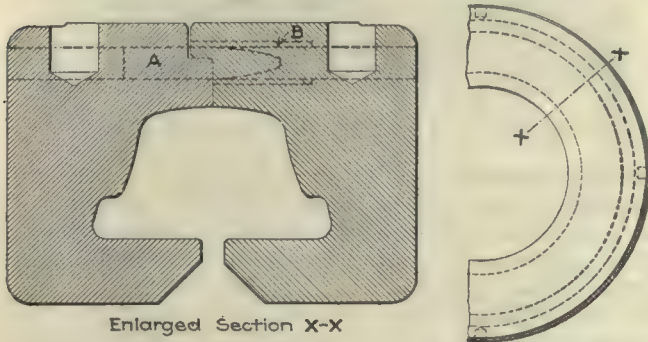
TIRE MOLD SHOWING FORM-CUTTER TOOL
